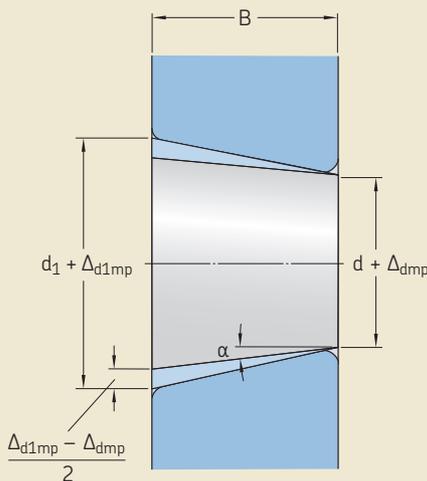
Tolerances for 1:30 taper bores.
